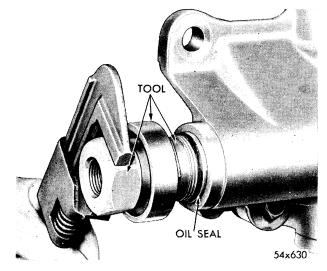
Removing Gear Shaft Oil Seal (Tool C-3350)
